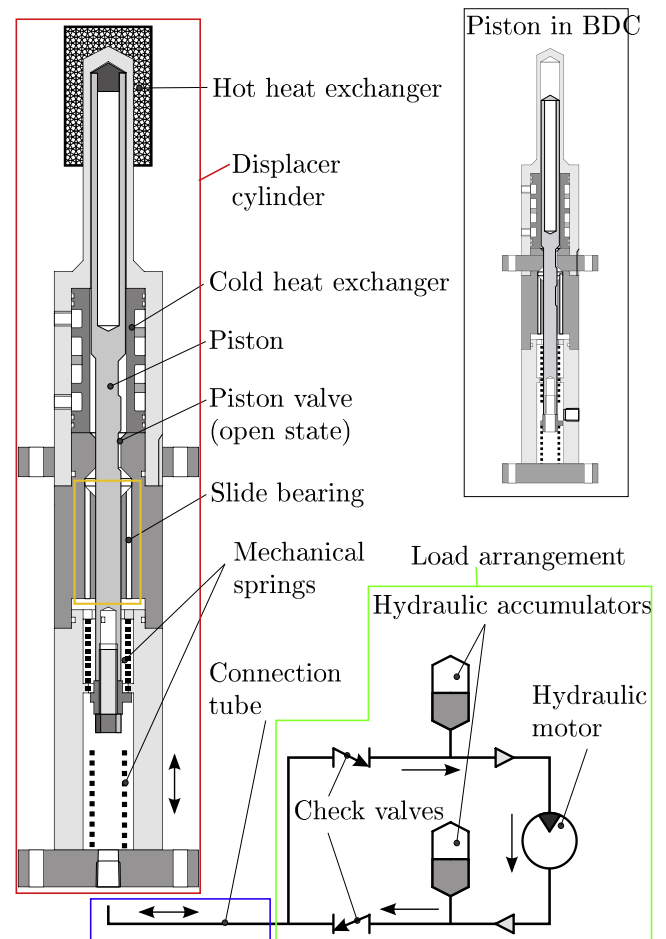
Schematic of the Up-THERM heat engine with hot and cold heat exchangers, piston, piston valve, upper and lower mechanical springs and hydraulic motor with piston at TDC and BDC (inset).
